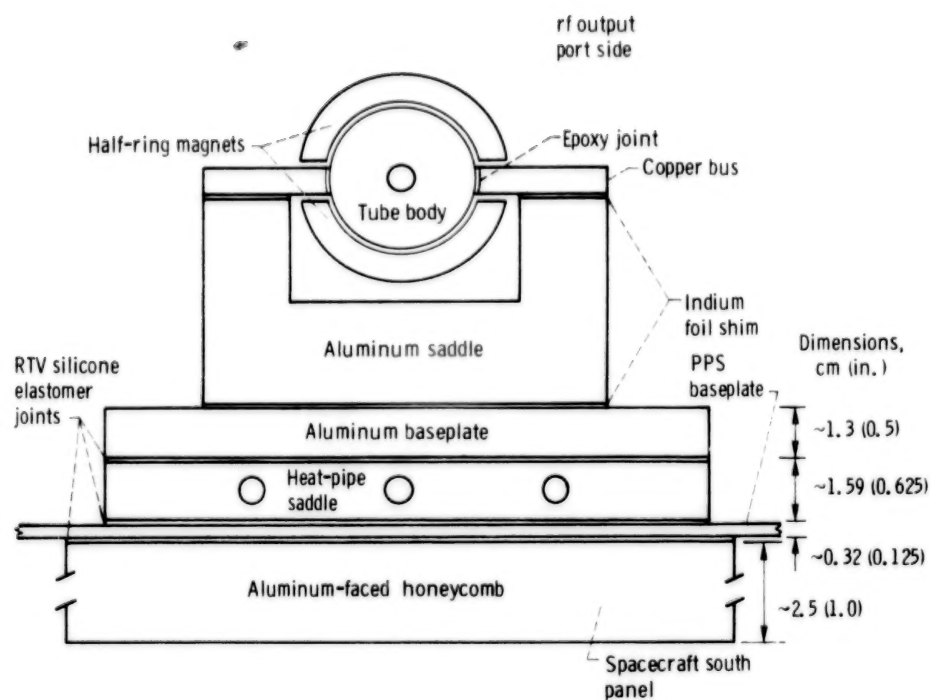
Section of CTS traveling-wave tube, showing heat-pipe saddle and spacecraft mounting details. (Section taken at plane A-A of fig. 2; not to scale.)
